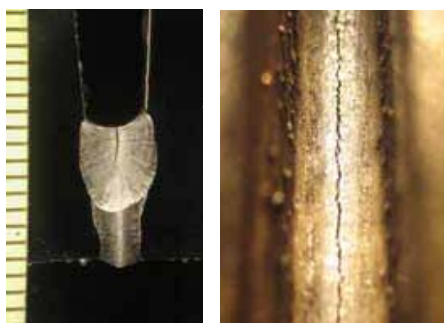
Macro cross-section showing hot cracking propagated into the surface of the first filling pass along the weld length
